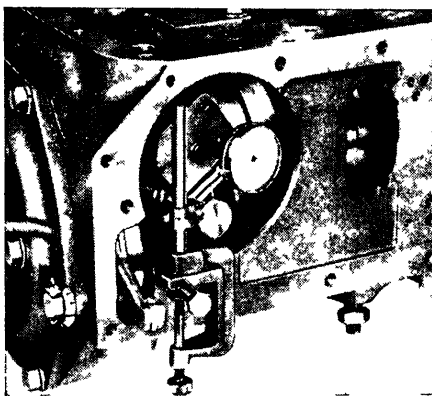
Check governor drive flange run-out with dial indicator as shown. If run-out exceeds .002", replace one or all of following parts: governor drive flange, gear set or complete oil pump. If run-out is less than .002", rotate governor 180 degrees from original position and reinstall governor body on flange. Then check governor run-out again. If run-out is still more than .005", replace governor and sleeve
